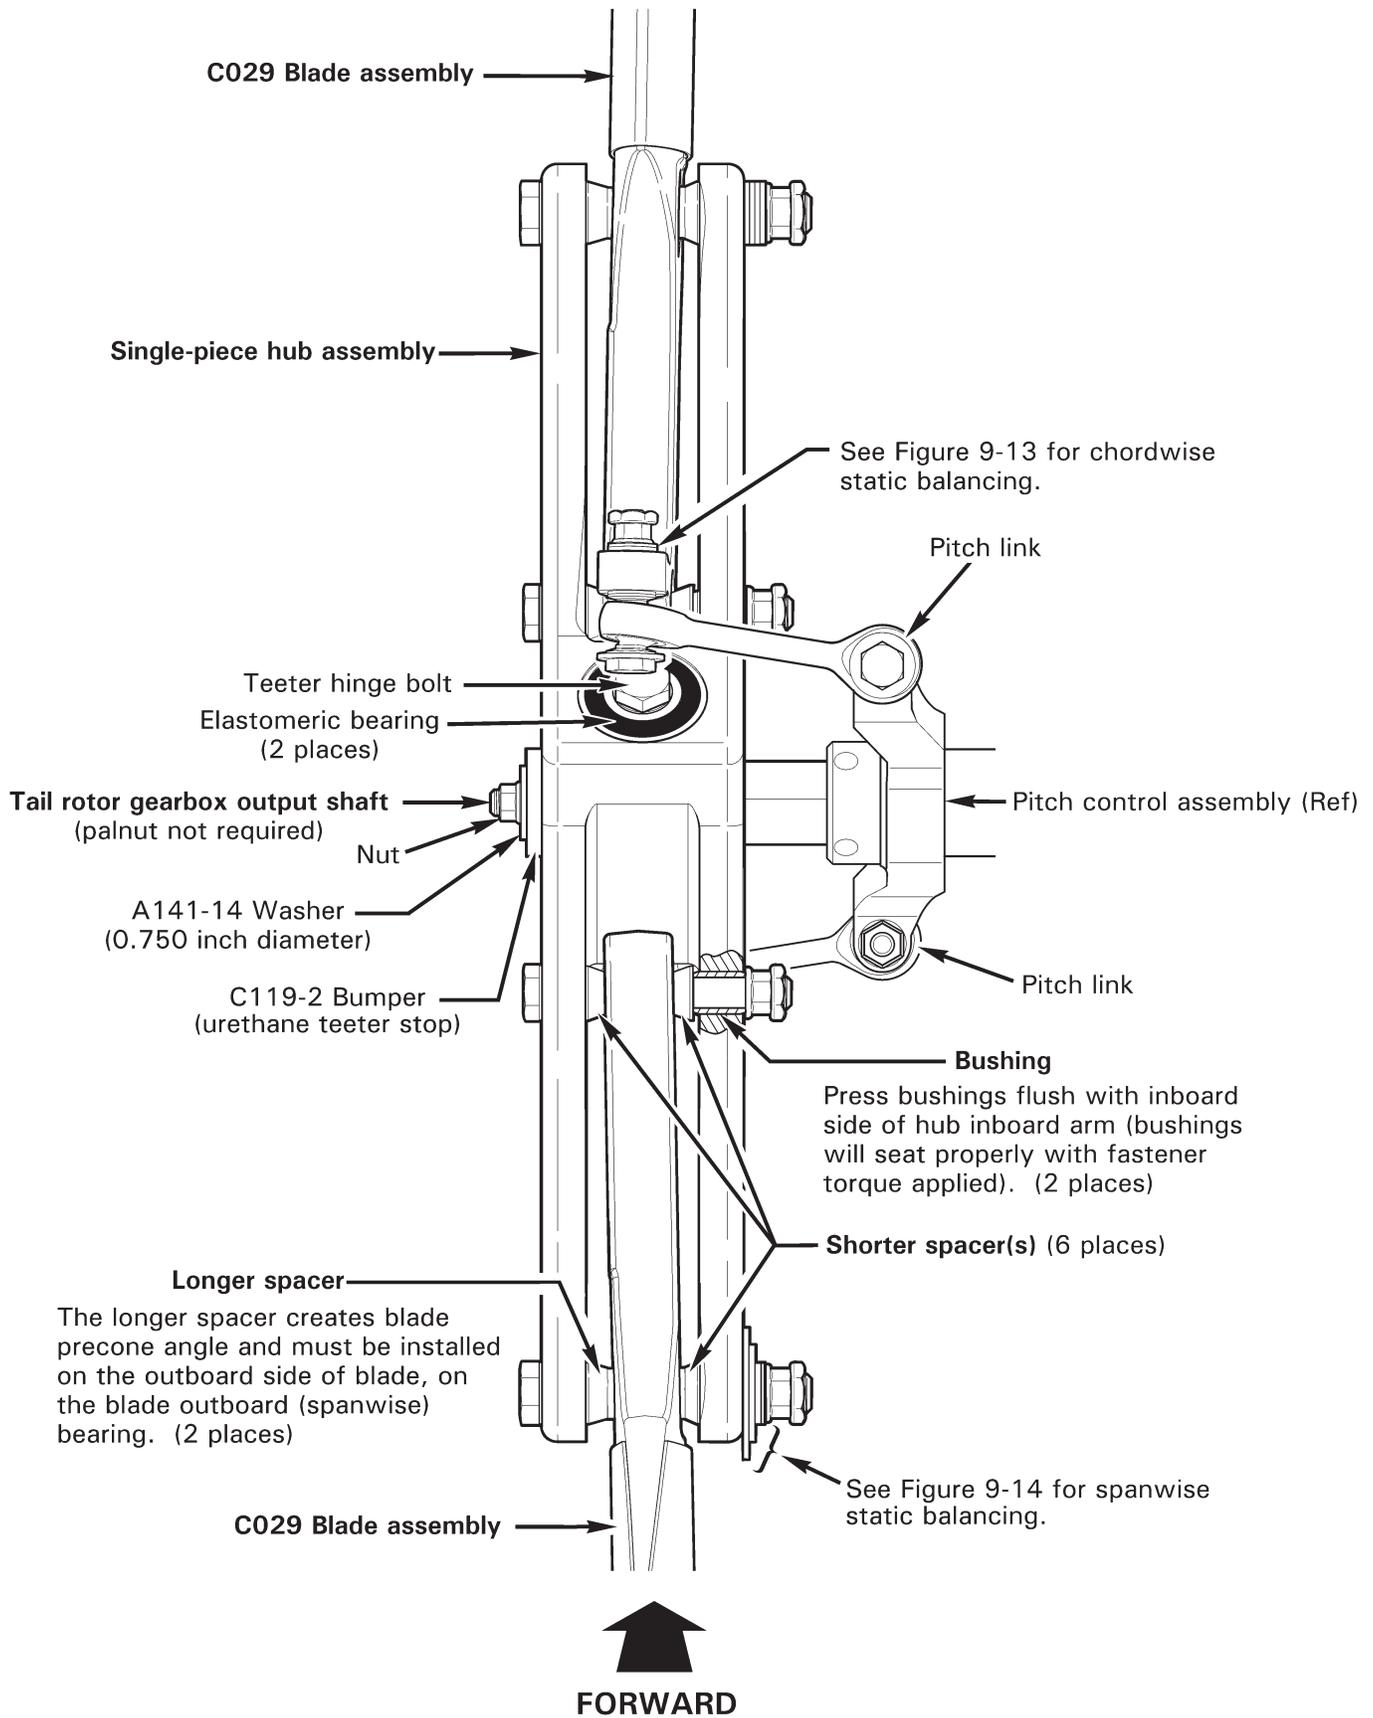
SINGLE-PIECE HUB TAIL ROTOR ASSEMBLY INSTALLATION
